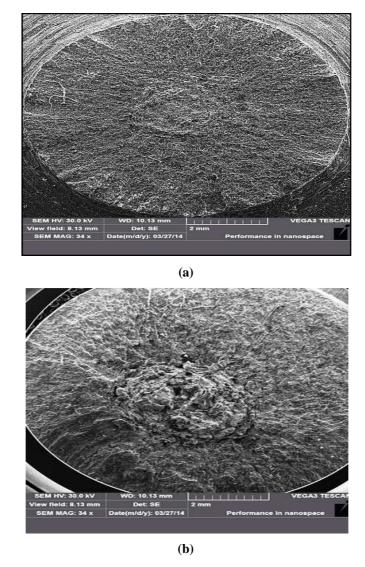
Fracture Surface of a Specimen AISI 1020, (a) Without Notches,(b) With Notches
